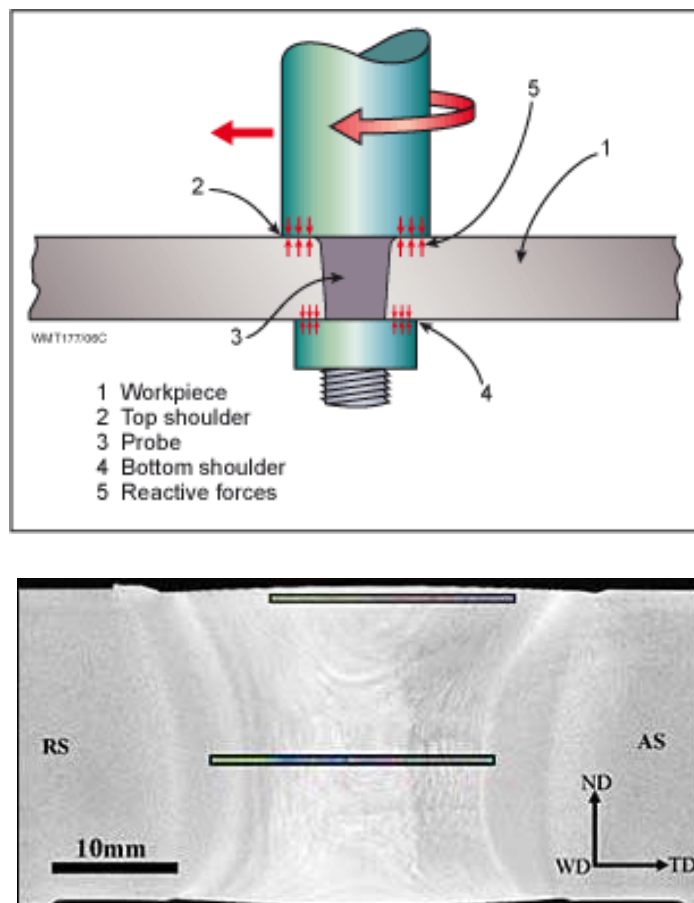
Schematic illustration of bobbin type tool friction stir welding and welded joint [61].
